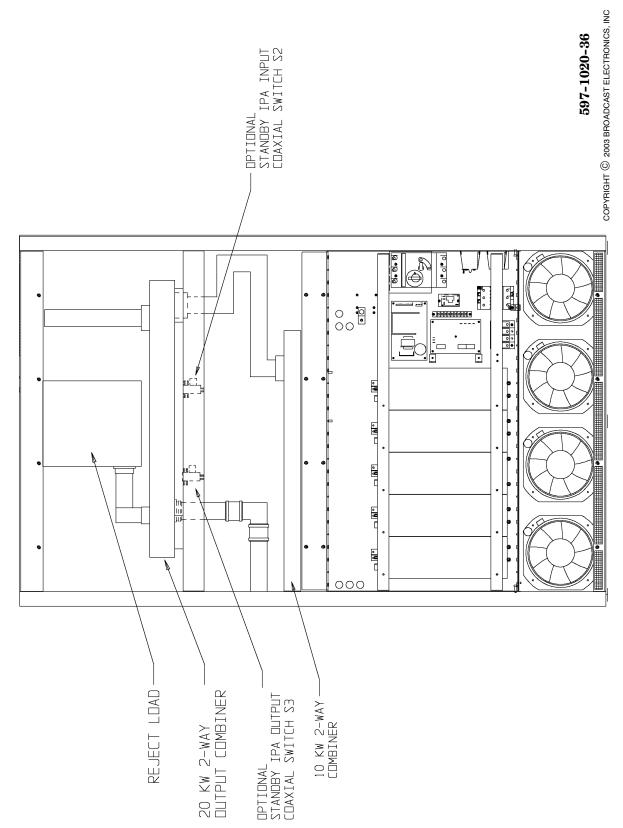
FM-20S/FMi 1405 COMPONENT LOCATOR (SHEET 11 OF 11)
